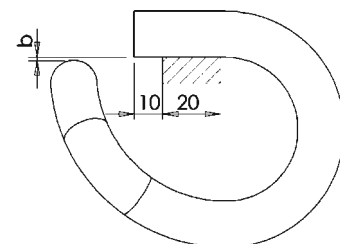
Dimension “b” of the SB4 spring clip measured with a base plate 20 mm wide and 10 mm distance from the end (method C) [Fig. A. Aniszewicz]
